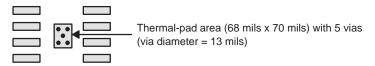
PowerPAD™ PCB Etch and Via Pattern
